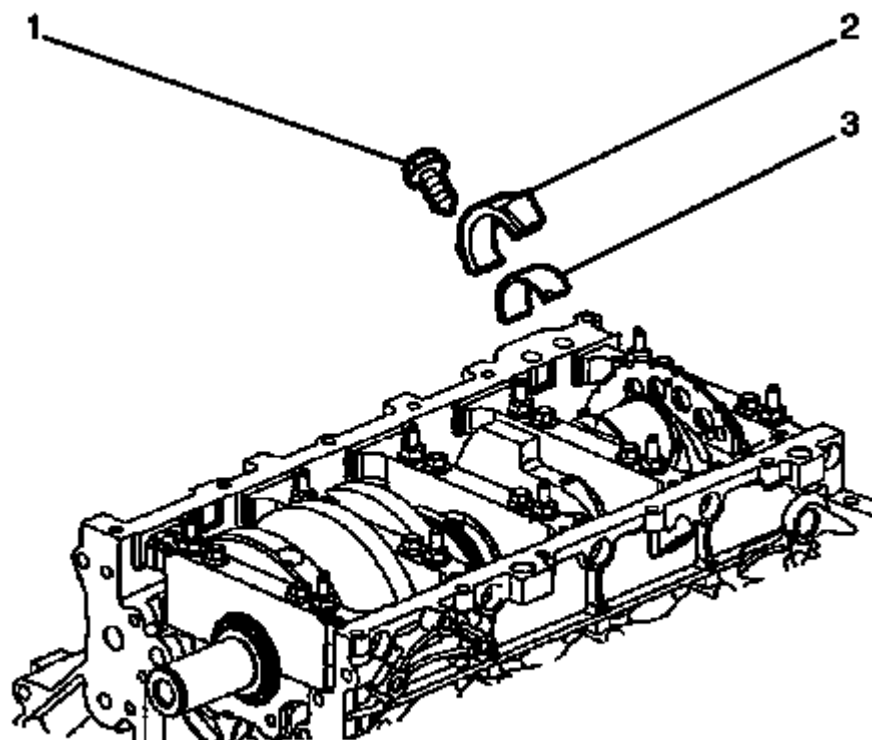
Identifying Connecting Rod Bolts, Bearing & Cap
